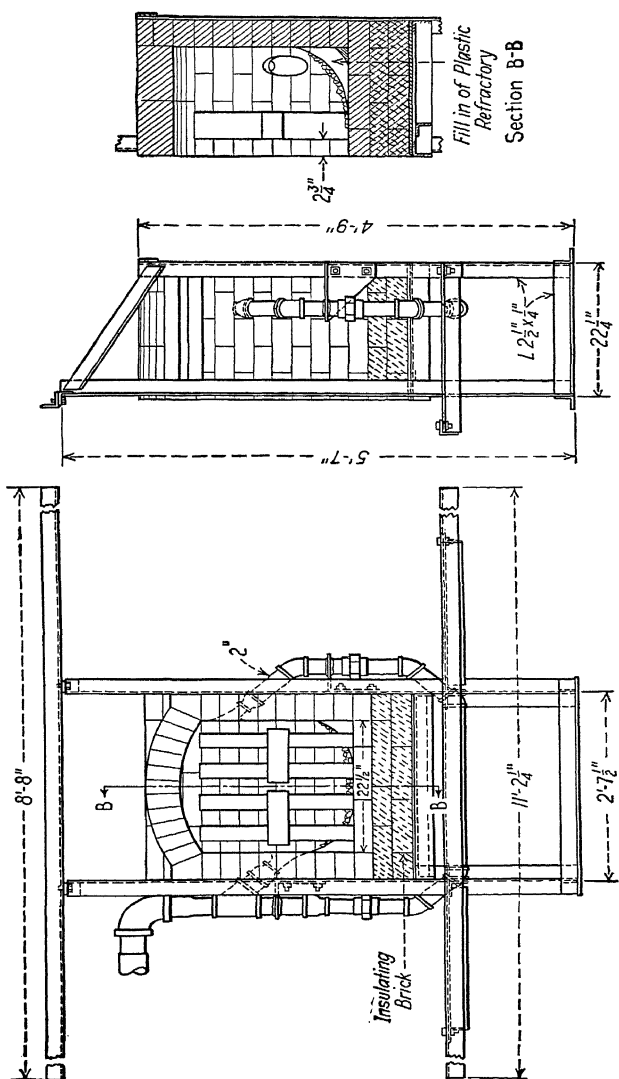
Furnace of the spalling equipment. The complete layout is shown in Figs. 10 and 11.
